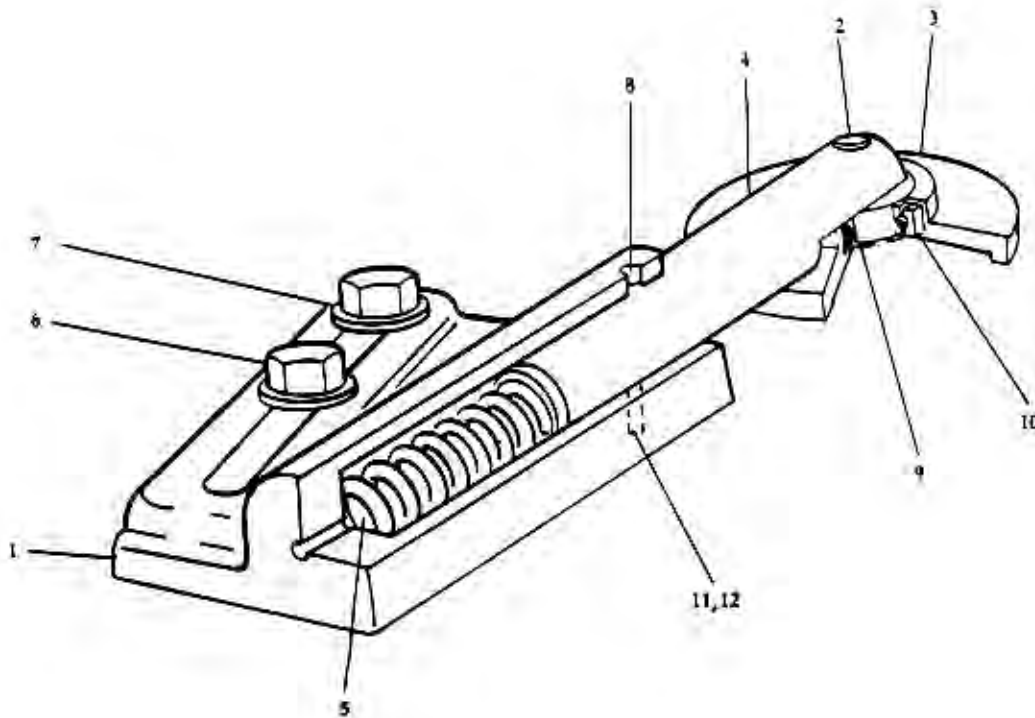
NEAR SIDE HEAD SPINDLE UNIT - 40MM DIAMETER SQUARE SHOULDER
